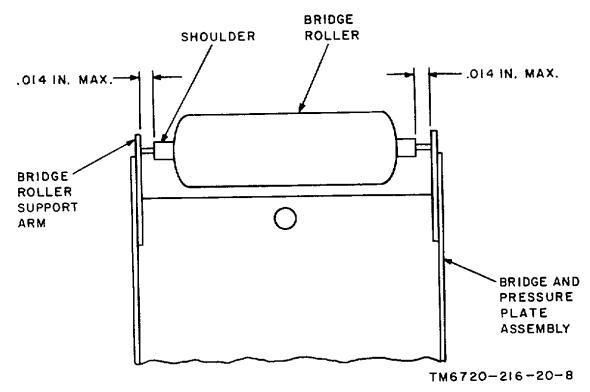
Gap between bridge roller and bridge roller support arm.
